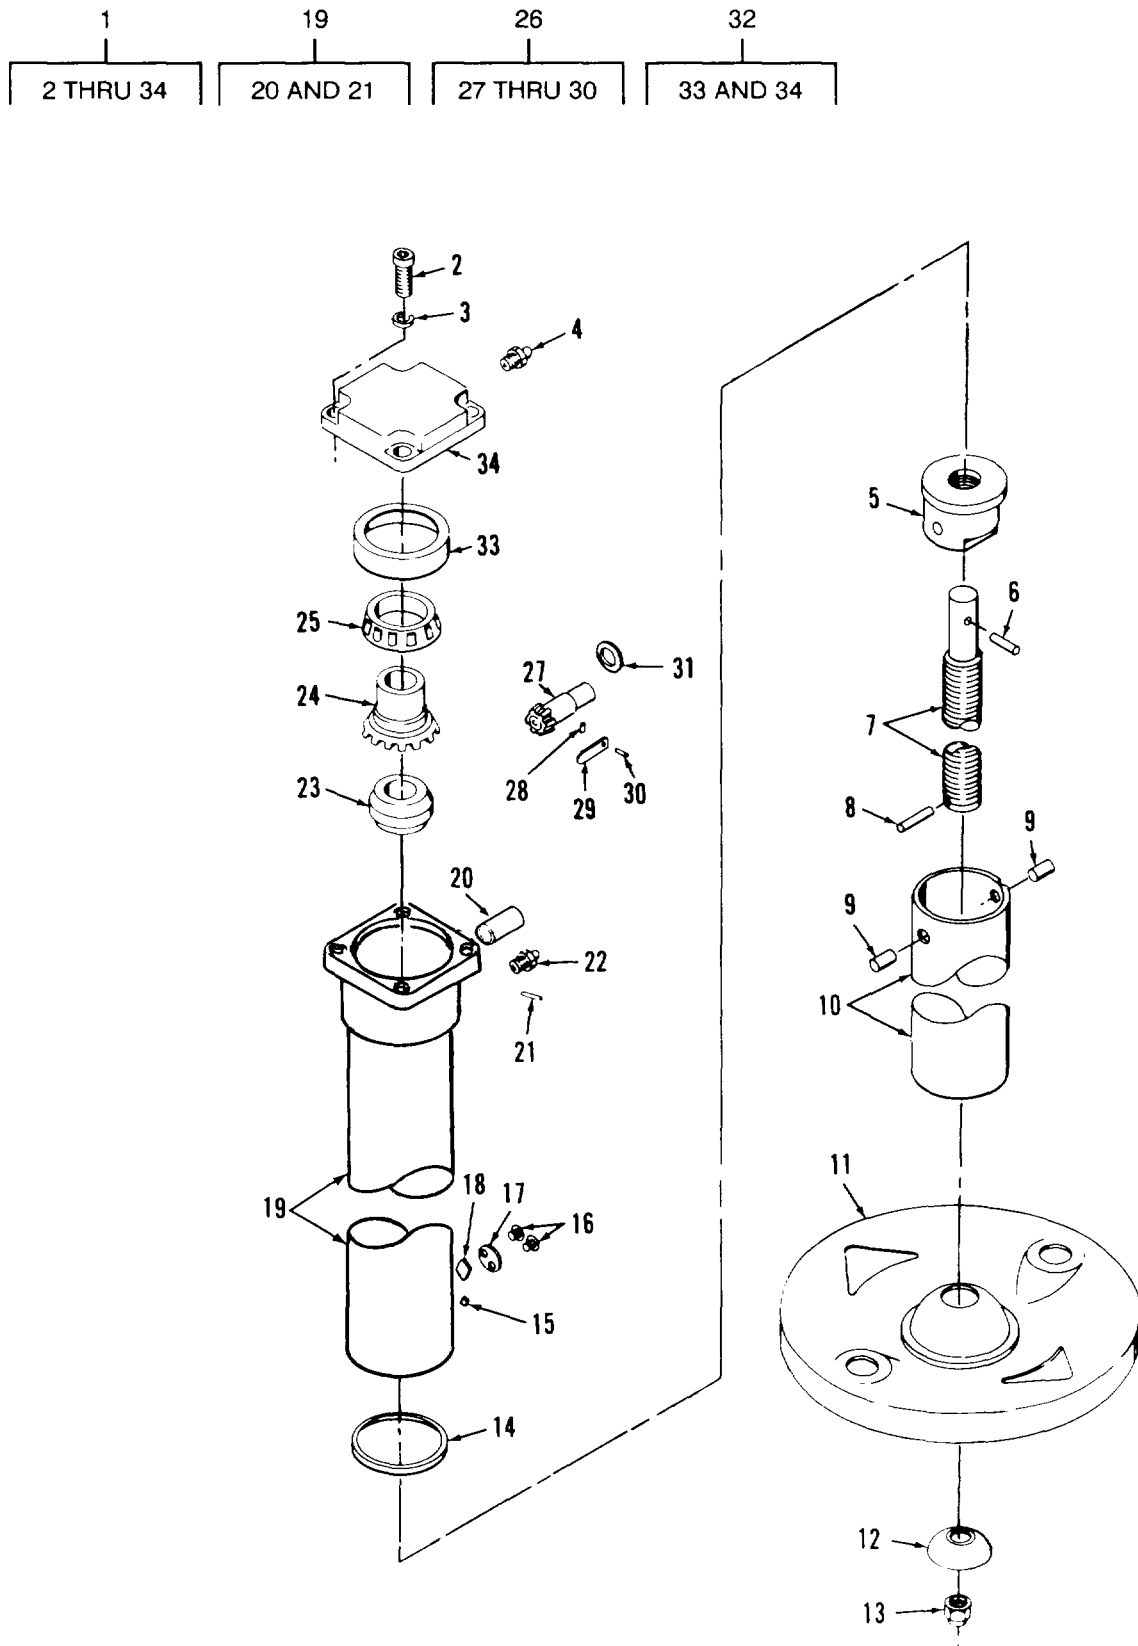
LEVELING JACK ASSEMBLY (M390C)
